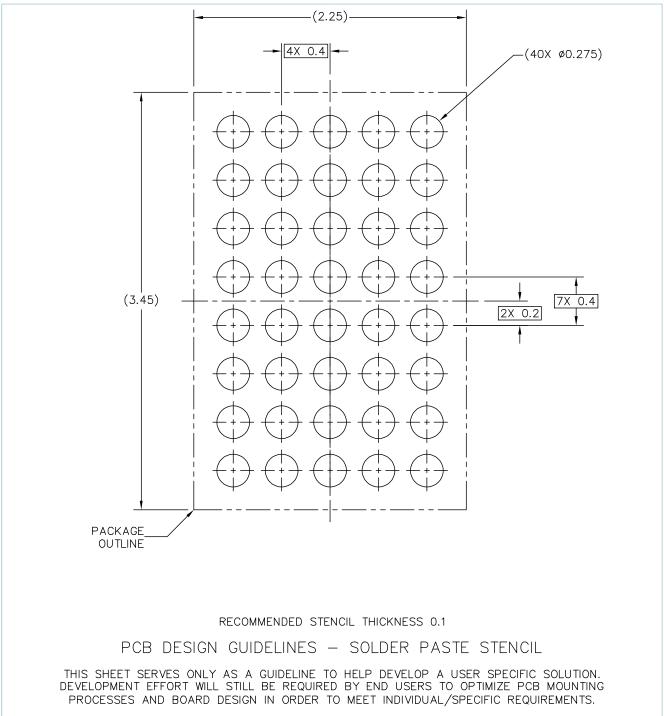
Reflow soldering footprint part3 for WLCSP40 (SOT1942-1)
